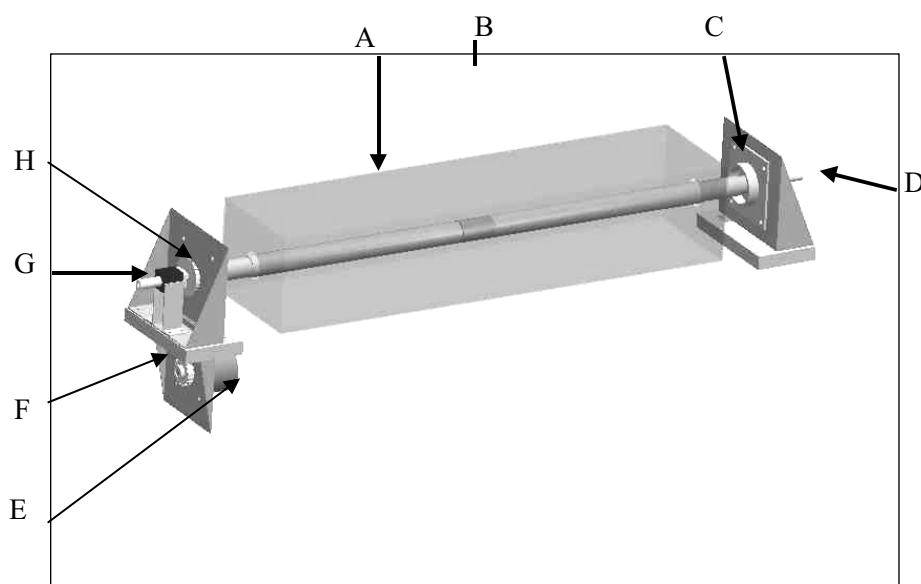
Rotating cylinder reactor assembly. (A) two-part, hinged, electric furnace, (B) reactor chamber, (C) bearings, (D) and (G) rotary seals, (E) step engine, (F) and (H) gears.
